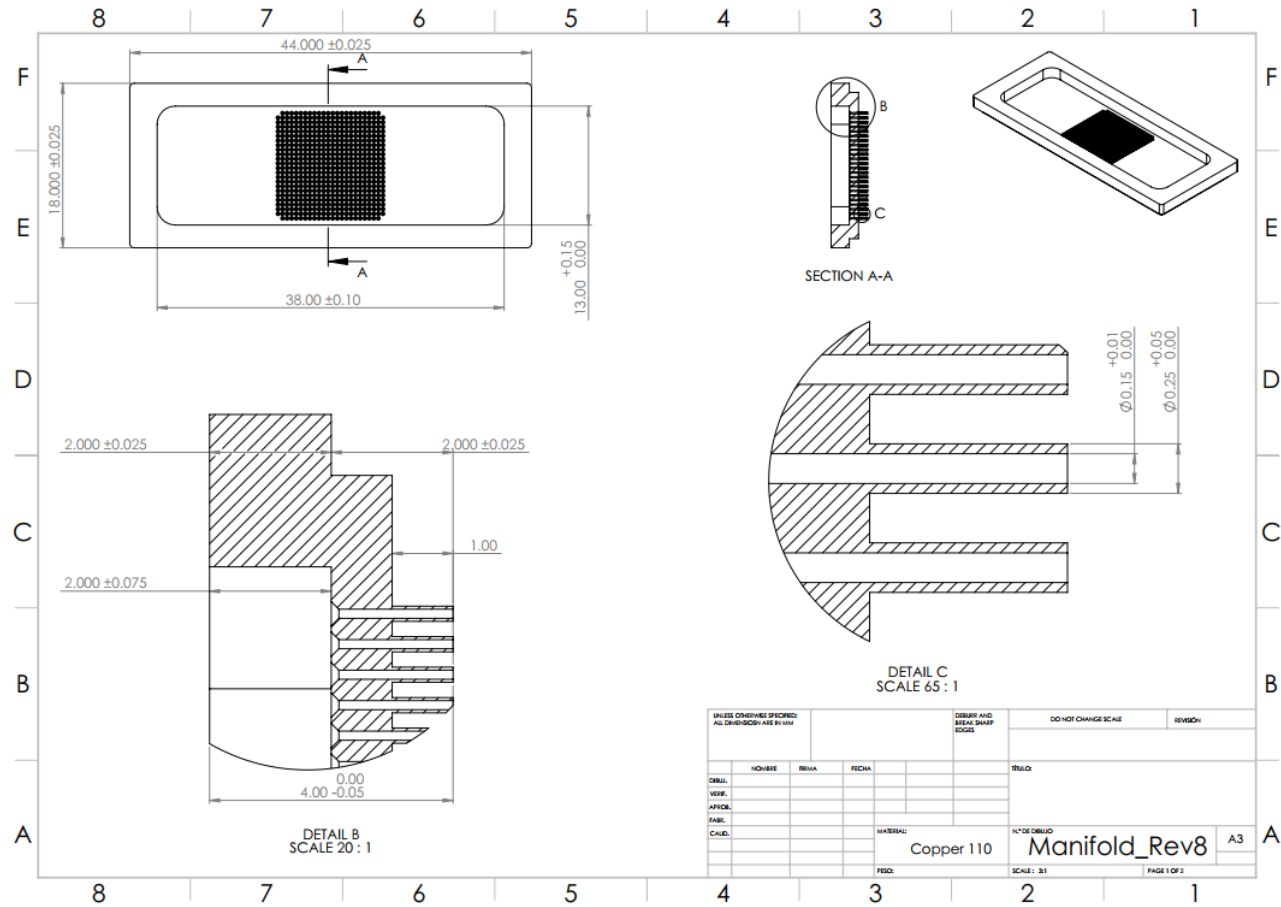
Page 1/2 for the mechanical drawing of copper manifold.
